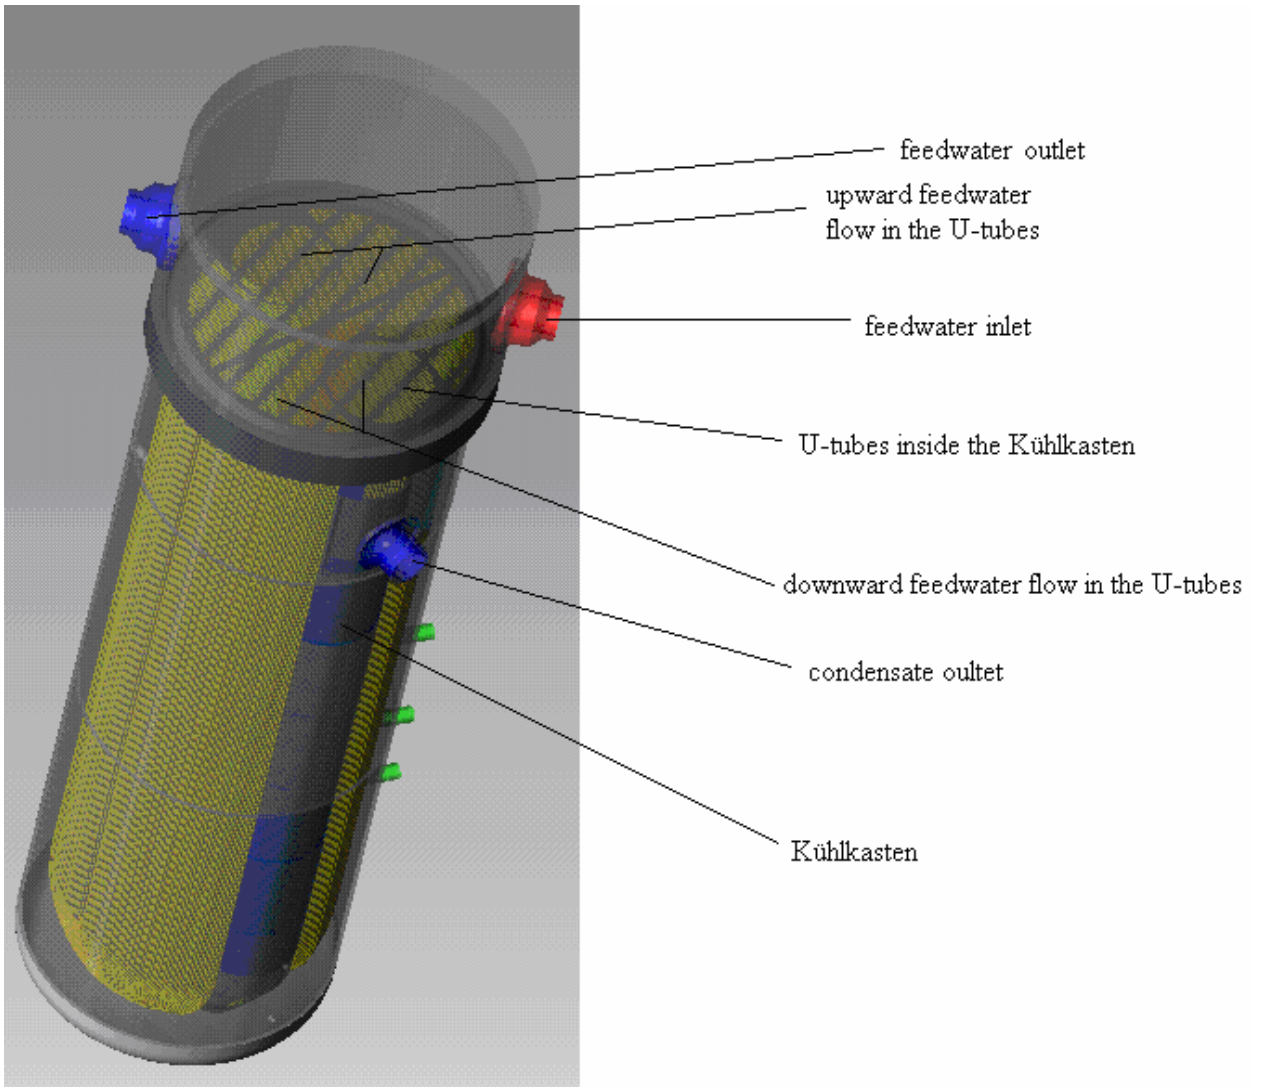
3D view of the tube bundle and tube-side flow pattern
